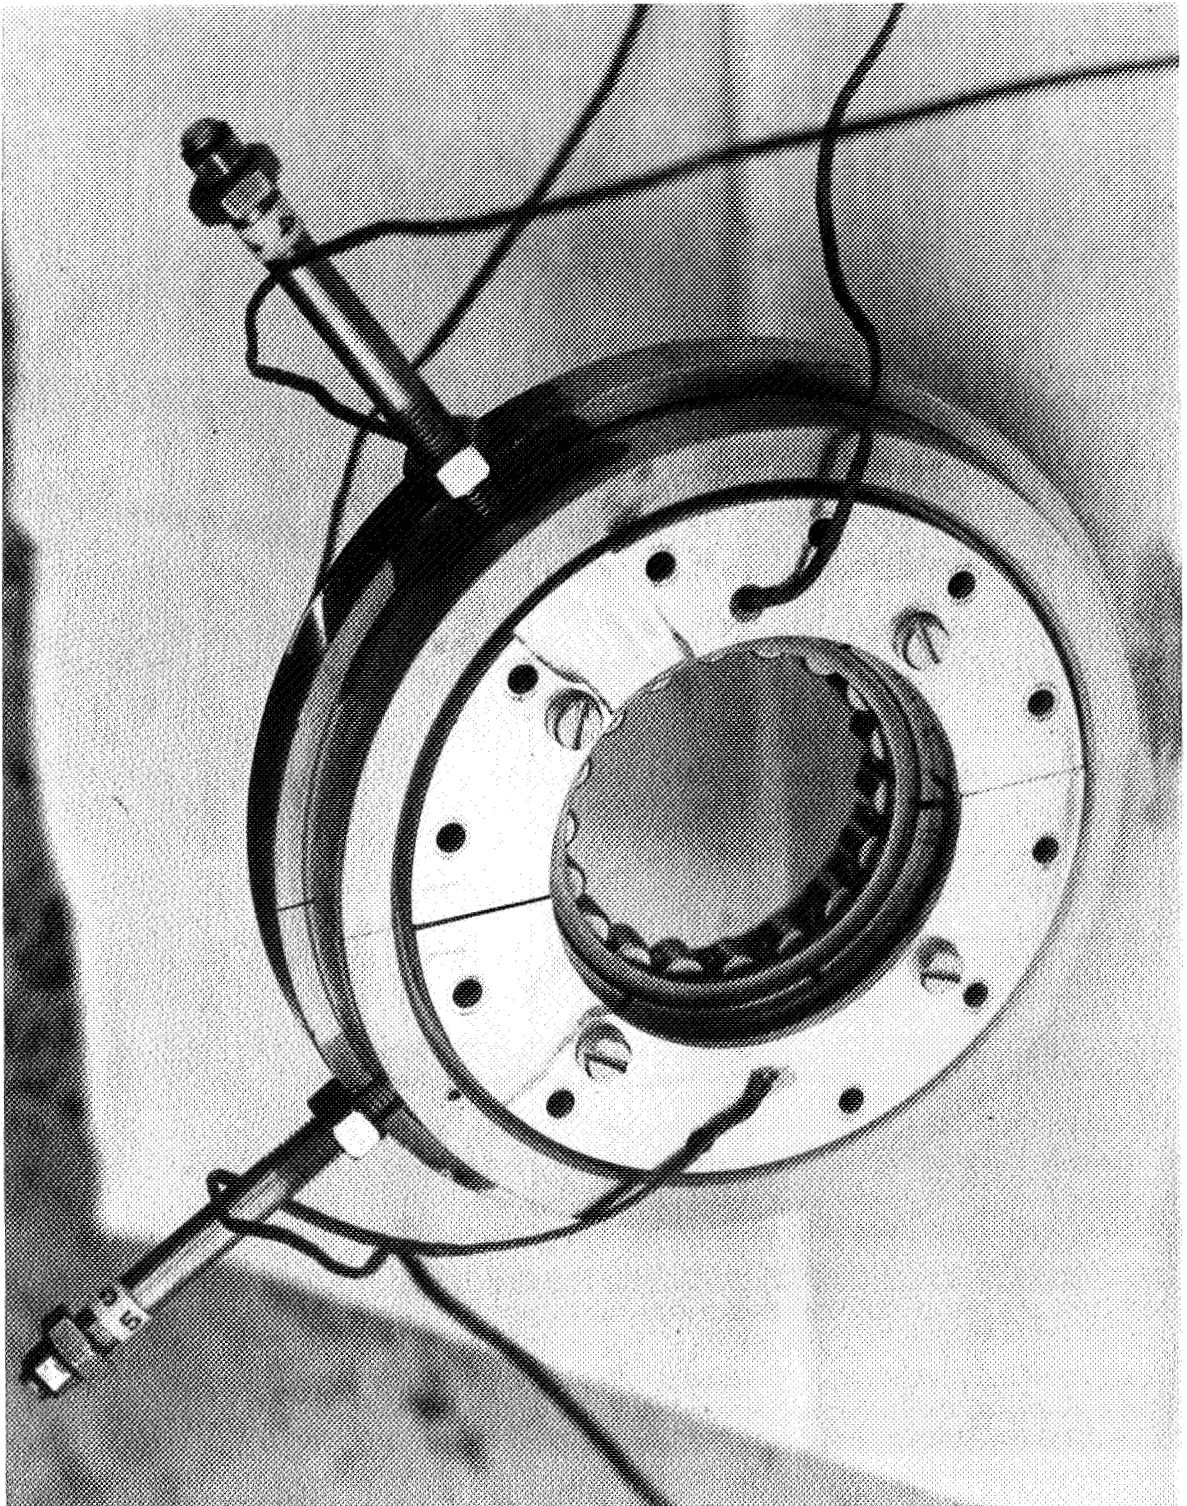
Assembled T55 Power Turbine Elastomeric Damper
